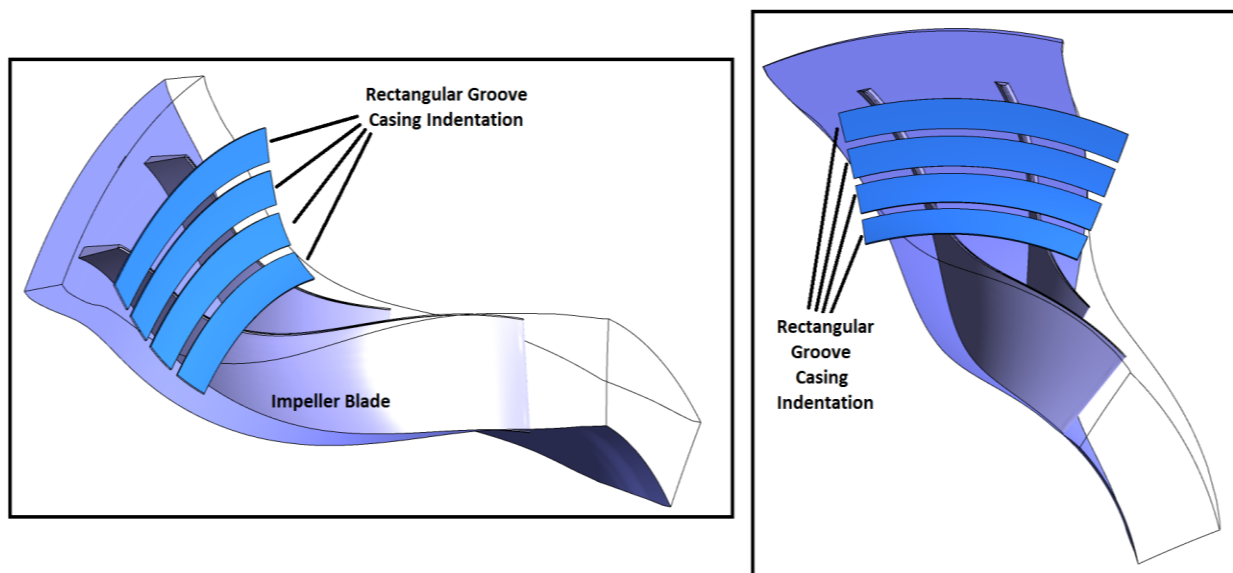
Centrifugal compressor impeller with the casing indentation
